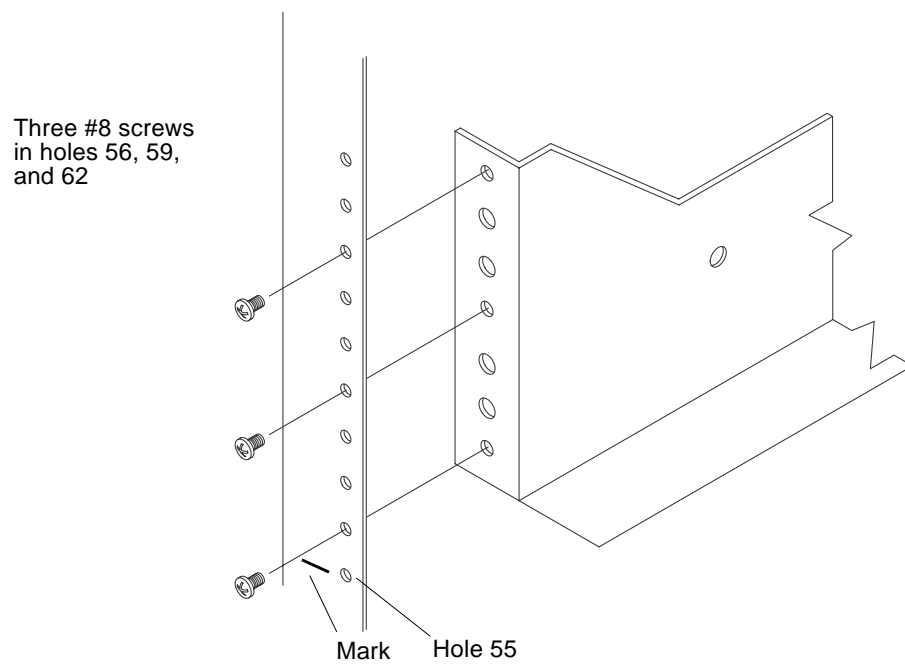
Attaching the Support Rail to the Front of Cabinet
